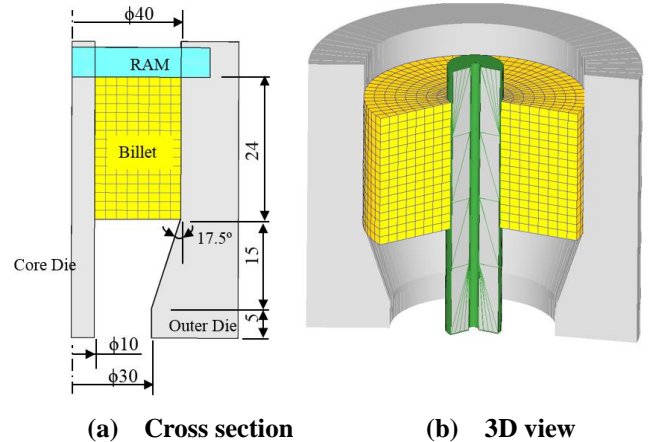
Tool setup of extrusion simulation and dimension of billet
